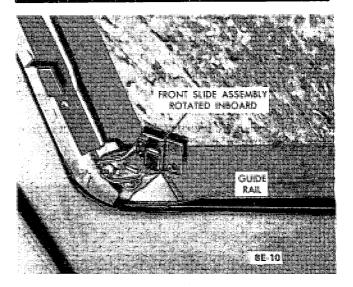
E-10 Front Slide Assembly Clear of Guide Rail
